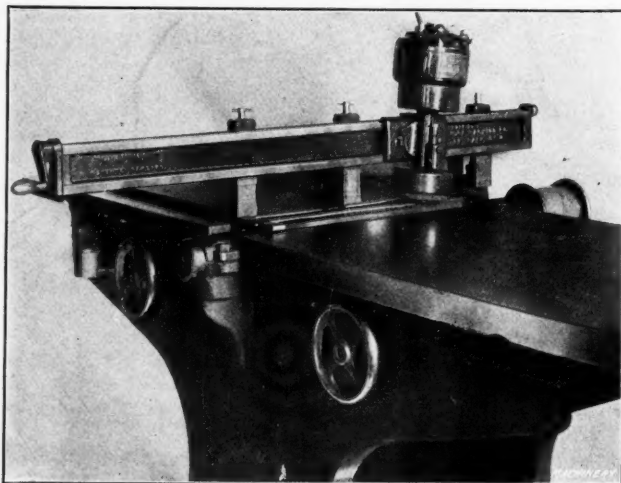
Stockbridge Grinder sharpening Jointer Knives
